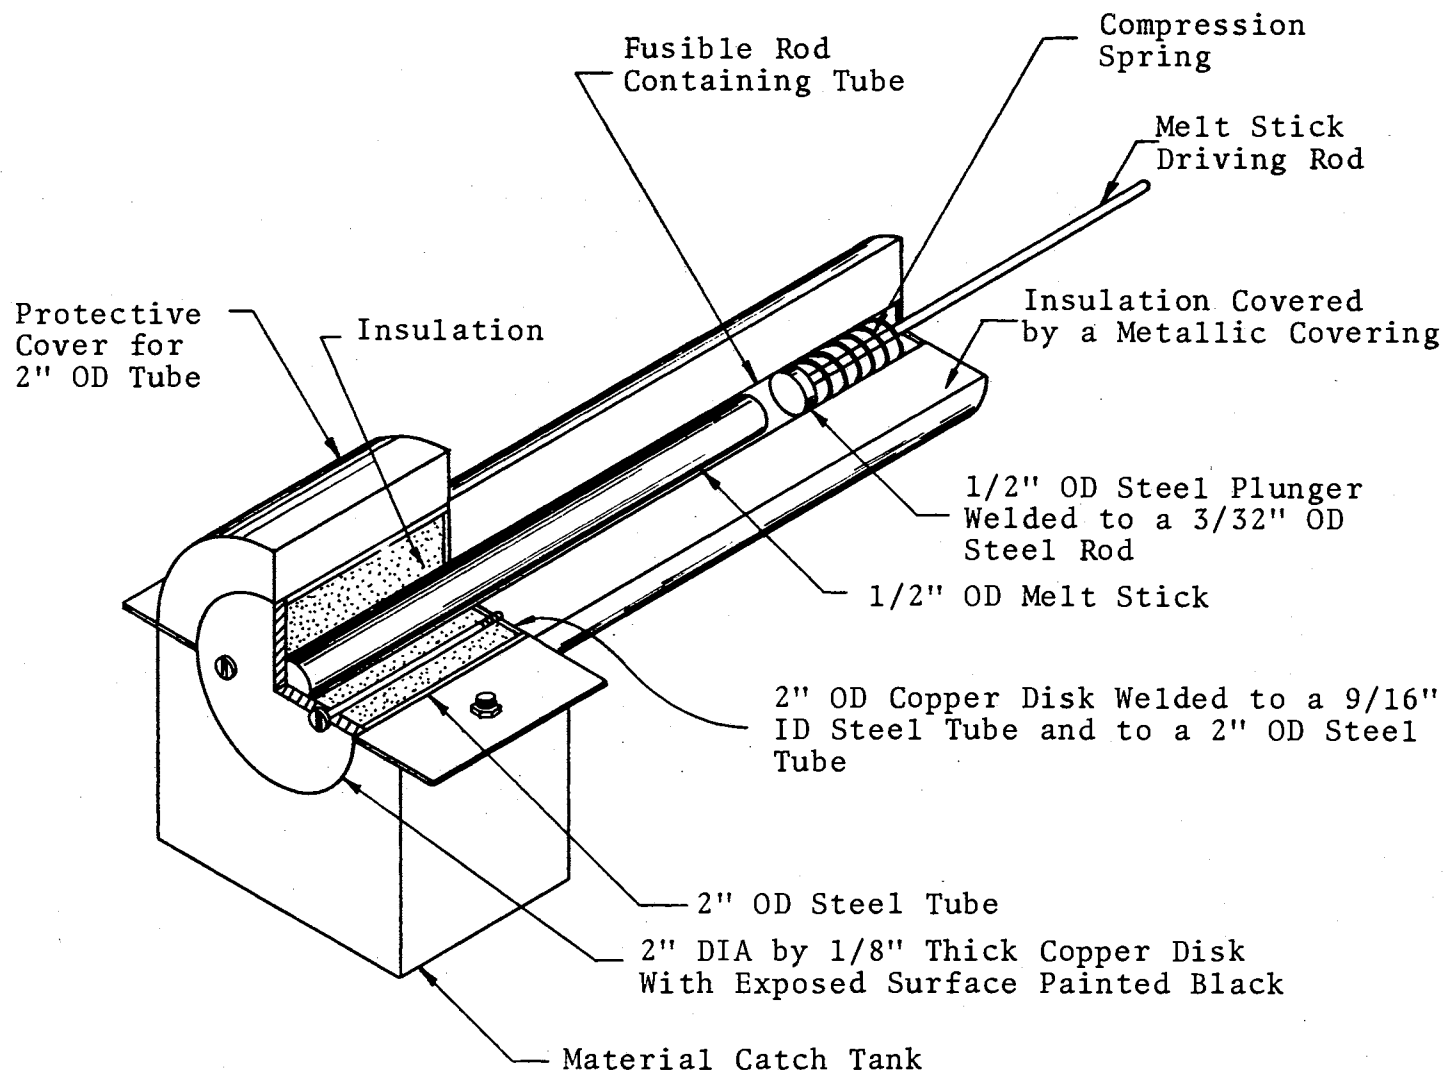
Fusible-Rod Integrated-Heat Flux Meter
